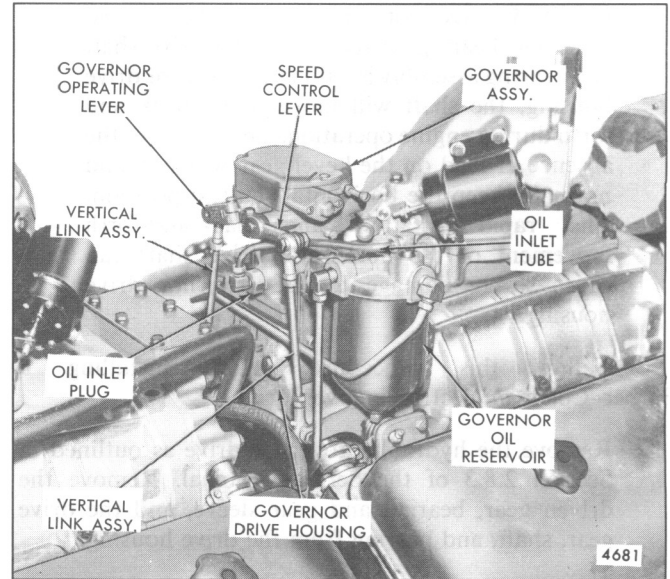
Hydraulic Governor Mounted on 16V Engine
